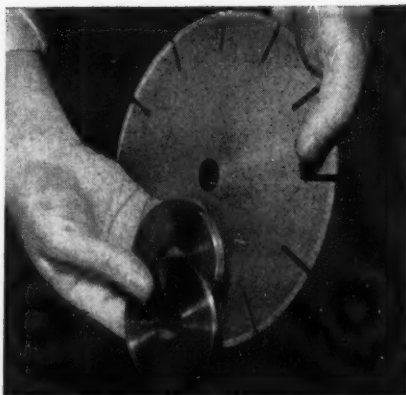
Diamond wheels of various sizes are employed at Wellman for cutting grooves in silicon alloy material used for clutch plates. The diamonds in each wheel are bonded in brass matrix.
